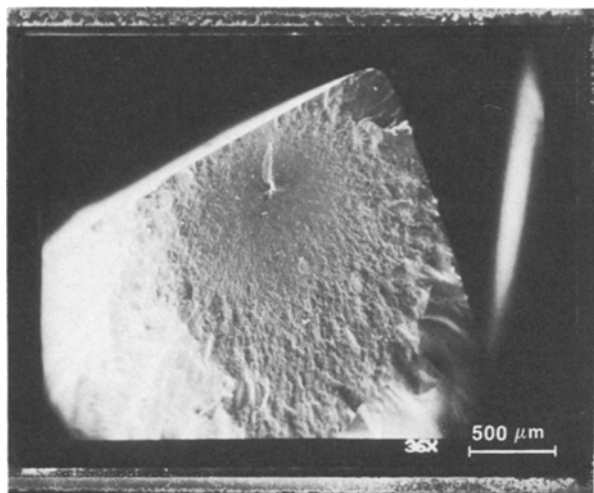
Fracture surface of hot-pressed SiC-10wt% Al₂O₃ showing failure from internal void.
